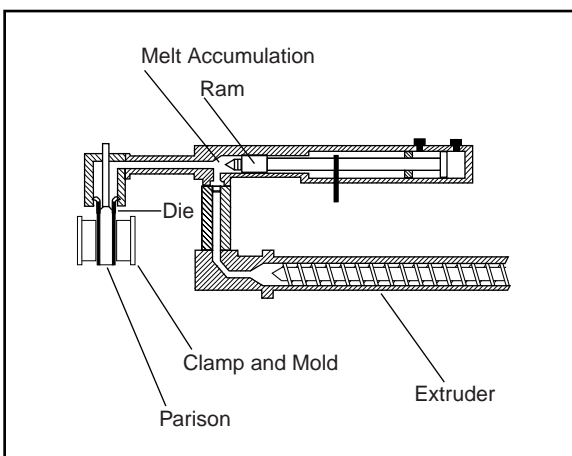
Intermittent Extrusion Blow Molding Ram-Accumulator System
